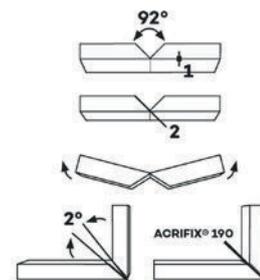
Bending by breaking, ca. 0.3 mm (1), adhesive strip (2).
